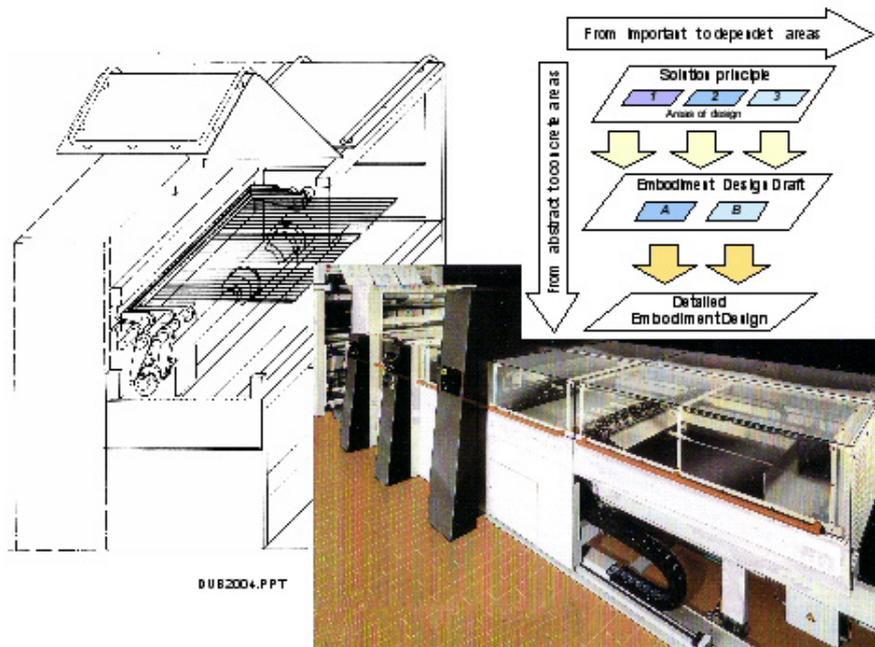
The high-tech unit for stacking foil-bags – draft, embodiment design process, and unit, integrated in the final production equipment
